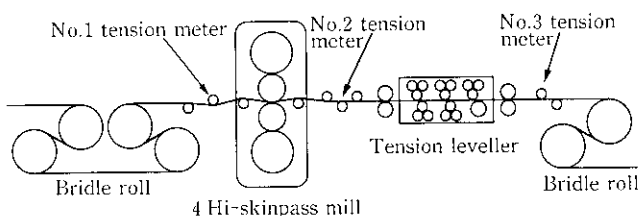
Roll arrangement of skinpass mill and tension leveller
